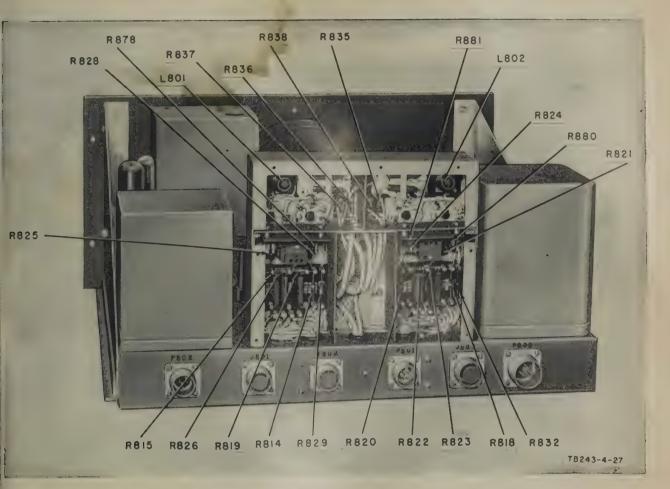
Bearing Indicator BC-1338, identification of parts, rear view.
